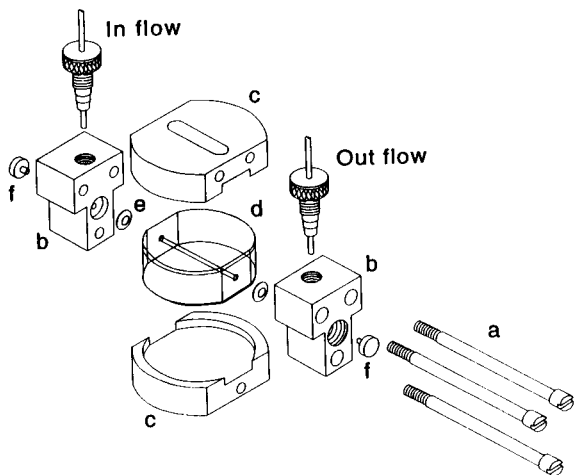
Exploded view of the refraction cell with manifolds. (a) tie rods; (b) LC manifold; (c) spacer plate; (d) glass cell; (e) seal; (f) window.
